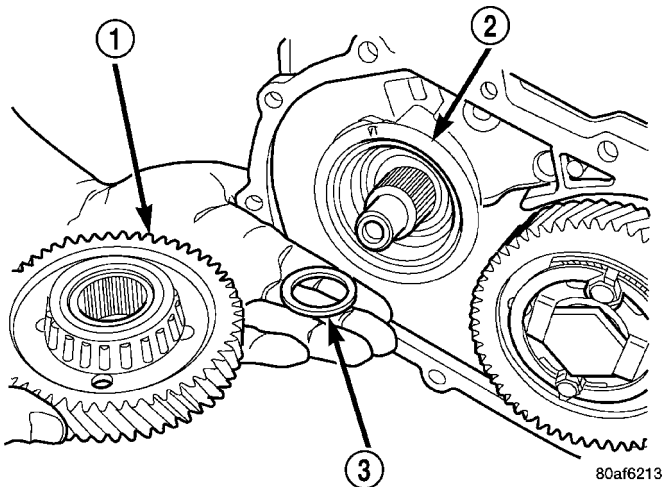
Remove Transfer Shaft Gear and (Select) Shim
